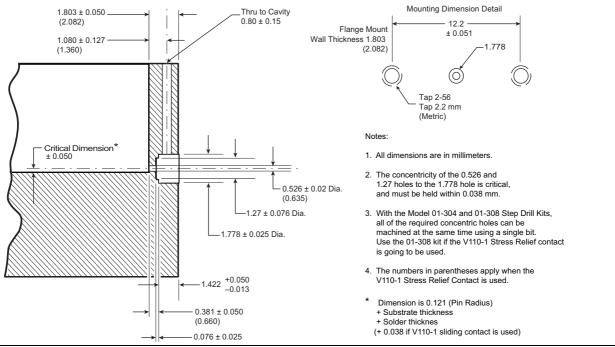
V103F-R Machining Dimensions for the Flange Mount Connector Mounting Holes
